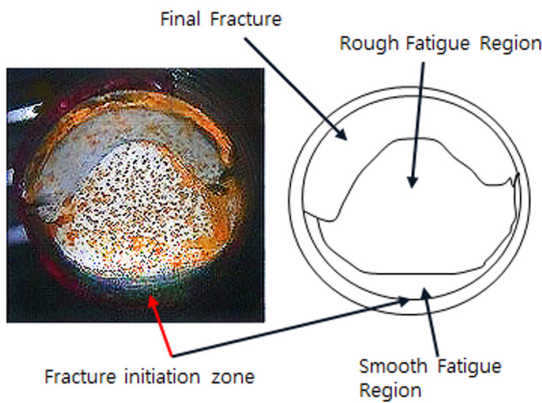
Macrograph and schematic of fracture surface of one of the fixing bolts.
